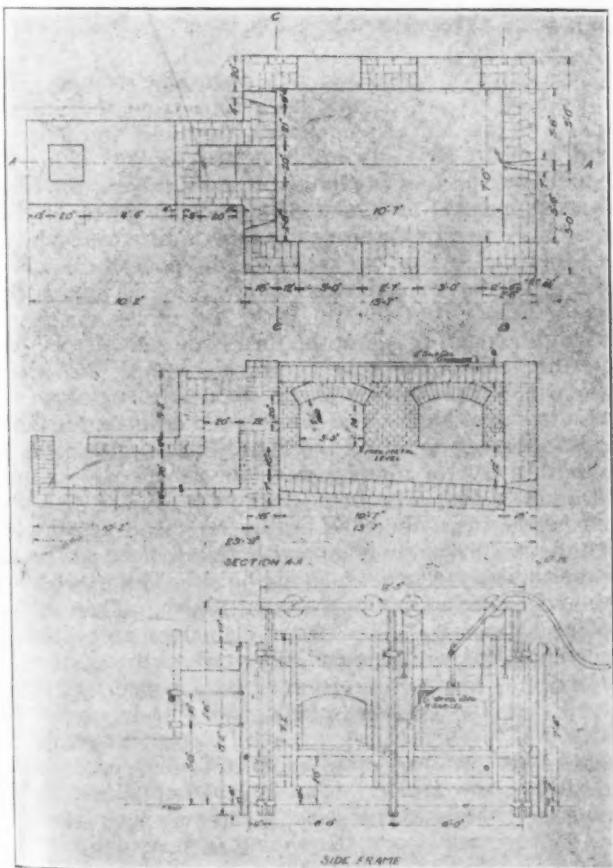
Detail Drawing Showing Construction of the Furnace in Fig. 1
